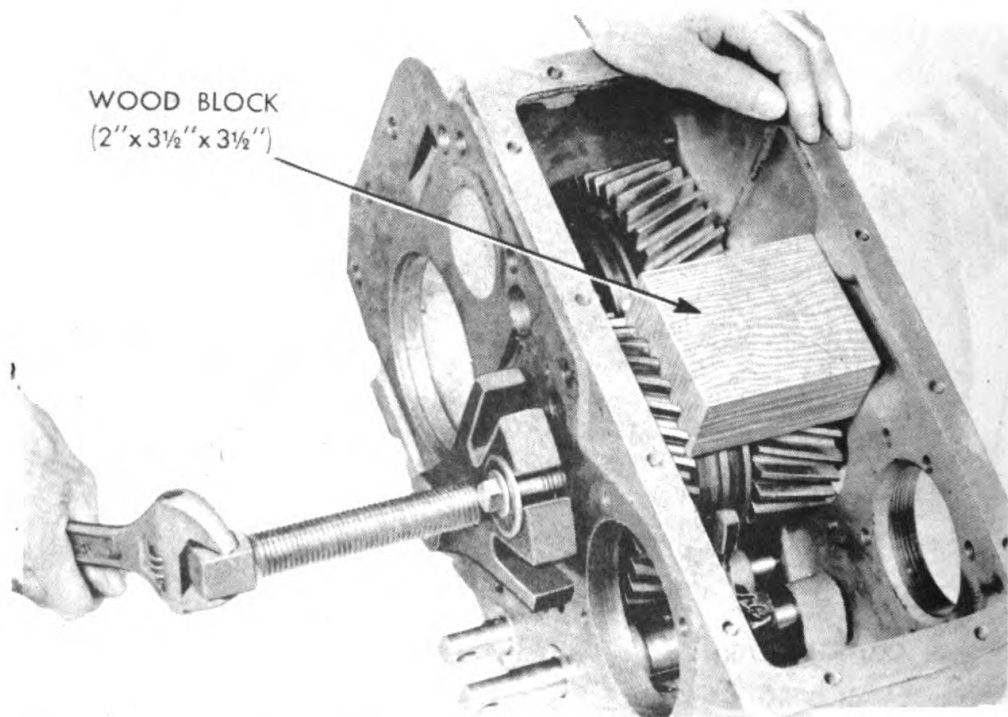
Removing Front Axle Drive Shaft Clutch Gear Thrust Washer
